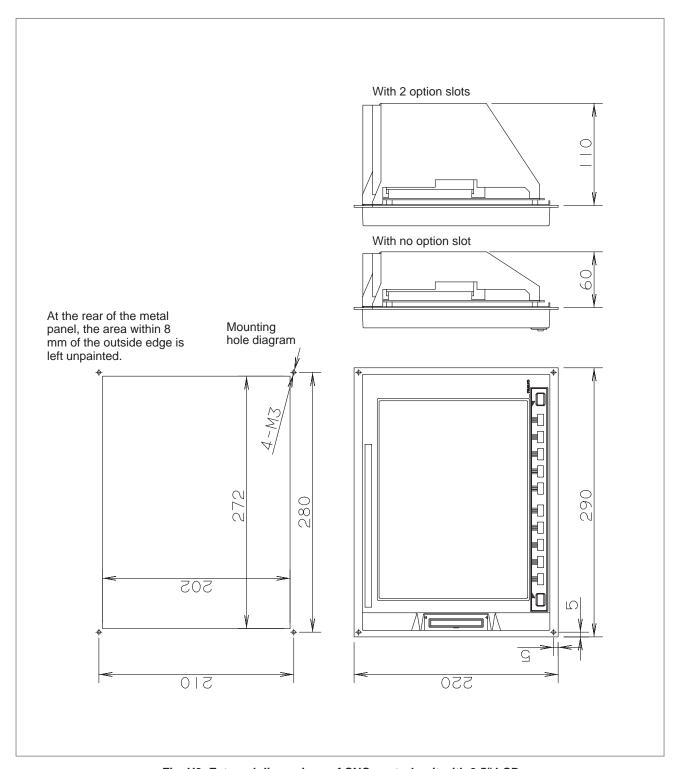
External dimensions of CNC control unit with 9.5" LCD
